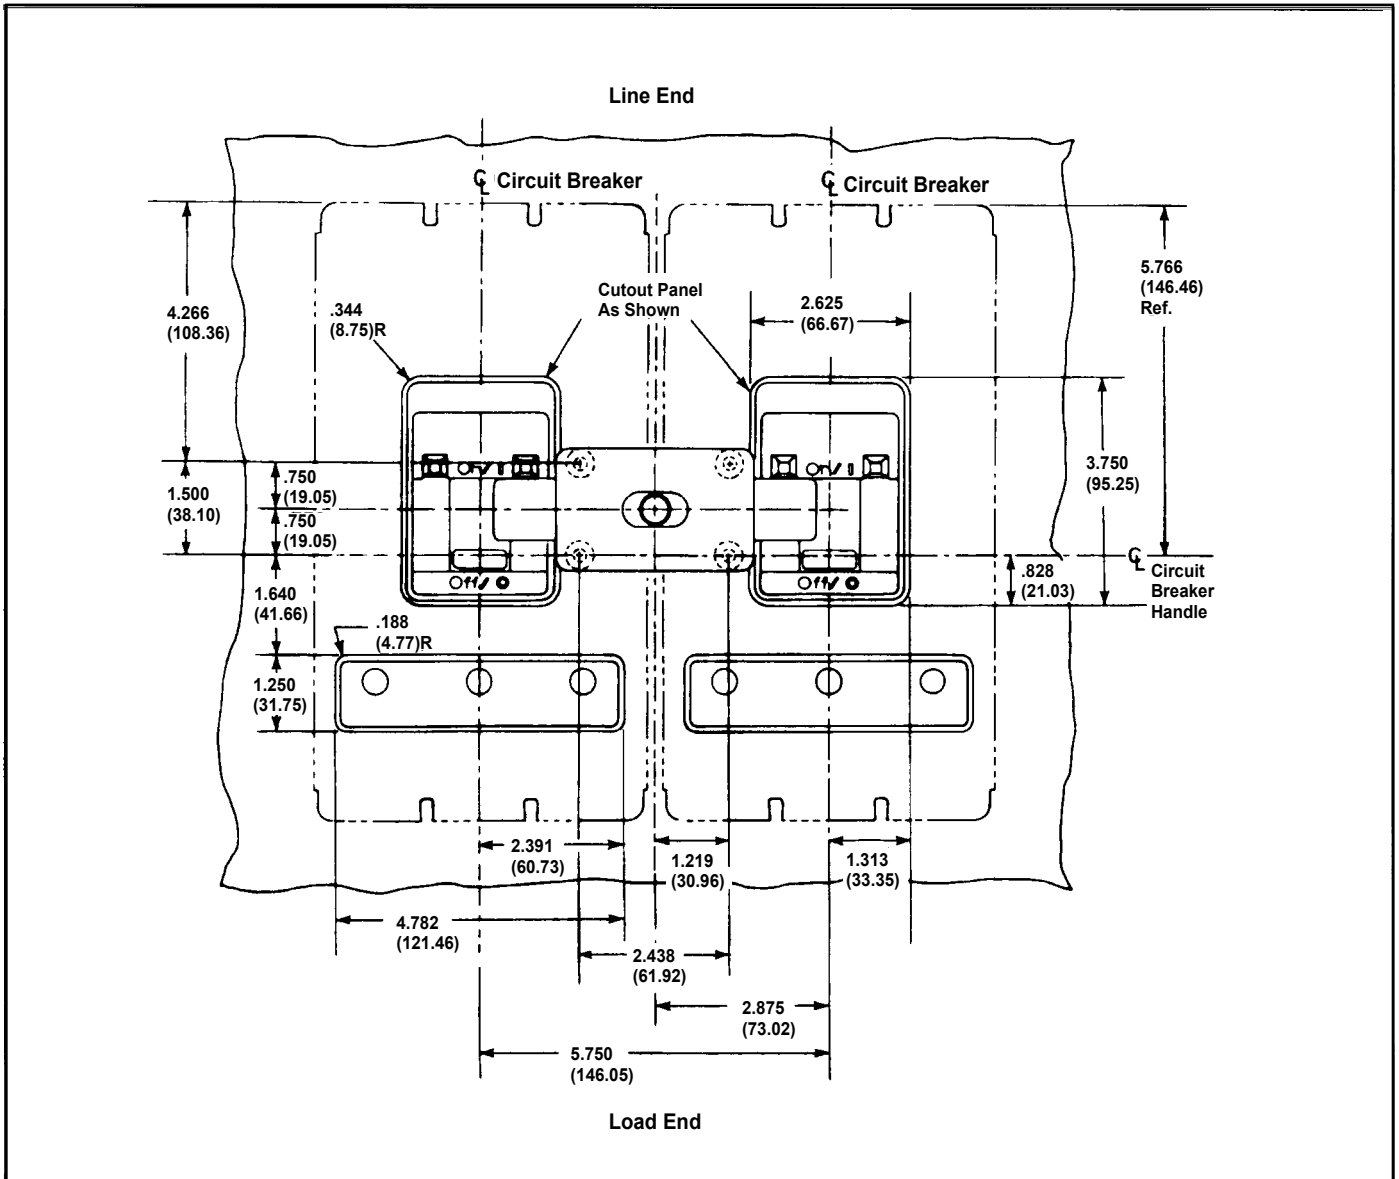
K-Frame Sliding Bar Interlock Installation Details.
